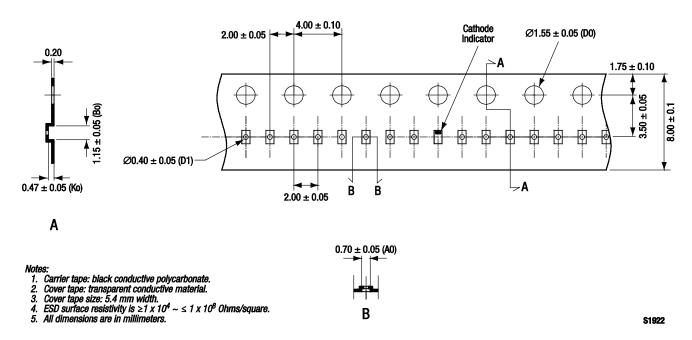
SMP1322-040LF Tape and Reel Dimensions
